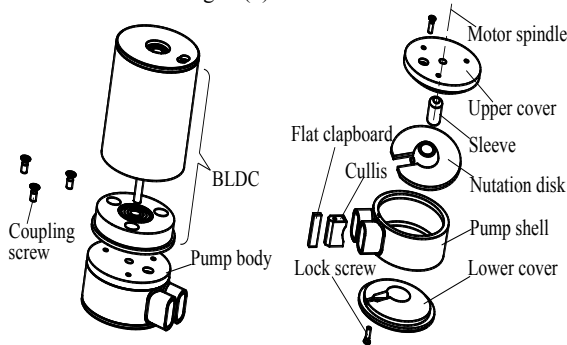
(a) The component of pump; (b) Pump body assembly diagram
